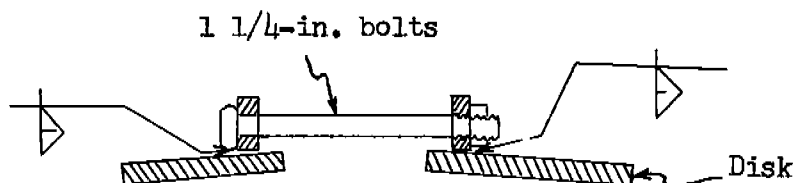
CROSS SECTION OF DISK SHOWING BOLT USED TO PULL SPHERE BACK INTO SHAPE
